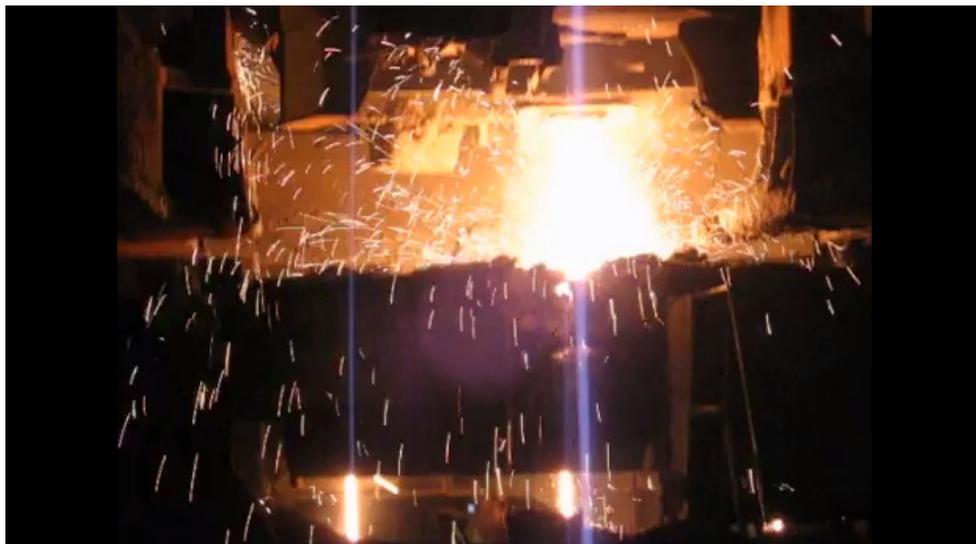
Open casting between ladle and tundish, with a 65 ton ladle. Splashing during tundish filling [3].
